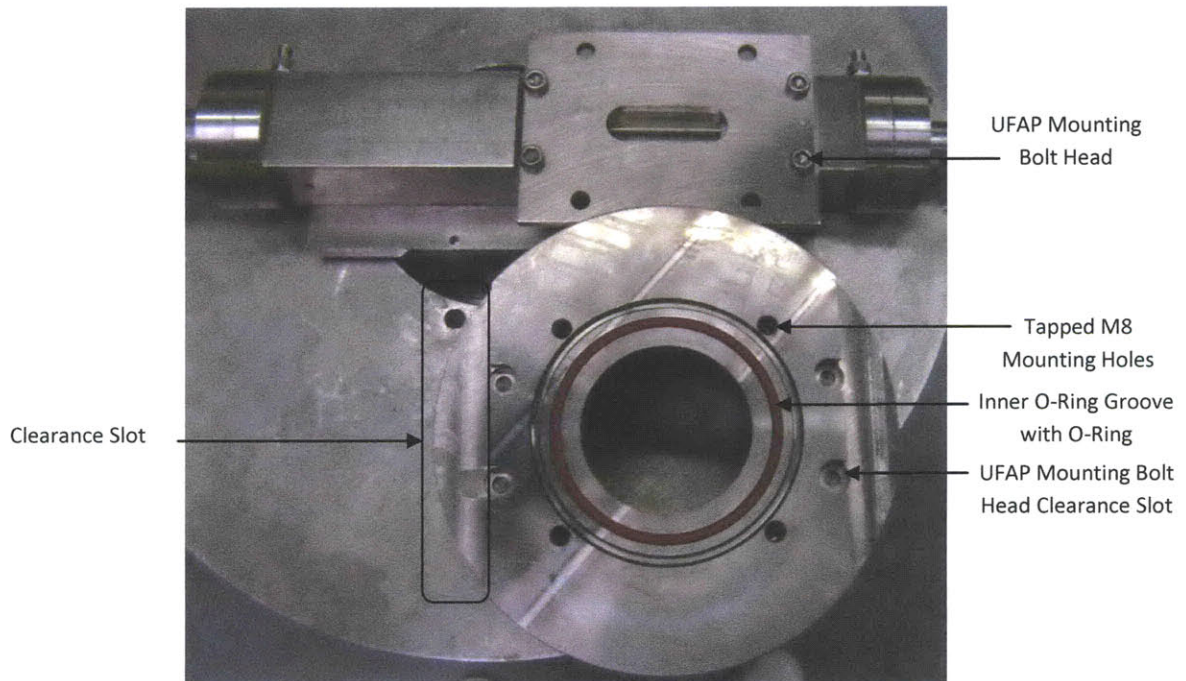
Constructed Upper Funnel During Assembly, Bottom View
